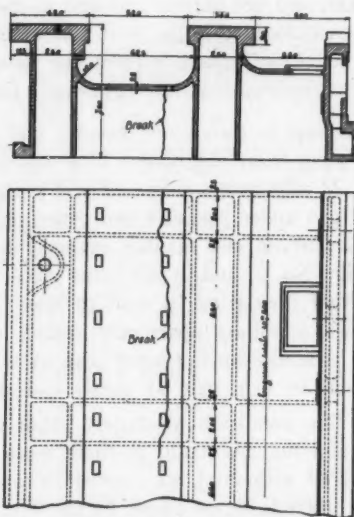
LATHE BED WHICH CRACKED BECAUSE OF POOR CORE SUPPORTS—DIMENSIONS GIVEN IN MILLIMETERS
